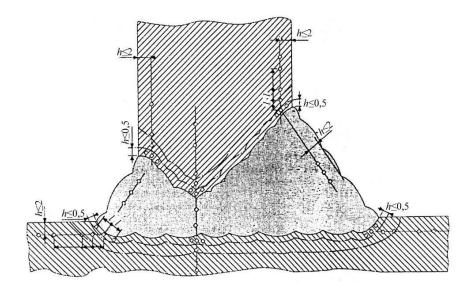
Arrangement of hardness measurement points in the heat affected zone and in the weld for tee joints performed with full penetration of the weld root (restriction for *l* according to \hat{F} ig. 6.4.6-2)
